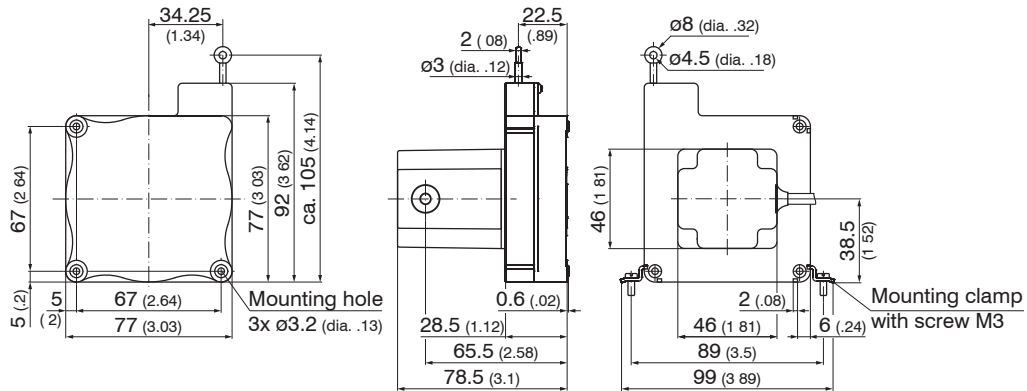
Dimensional drawing WPS-...-MK77-CR, with potentiometer and radial cable, dimensions in mm (inches), not to scale
